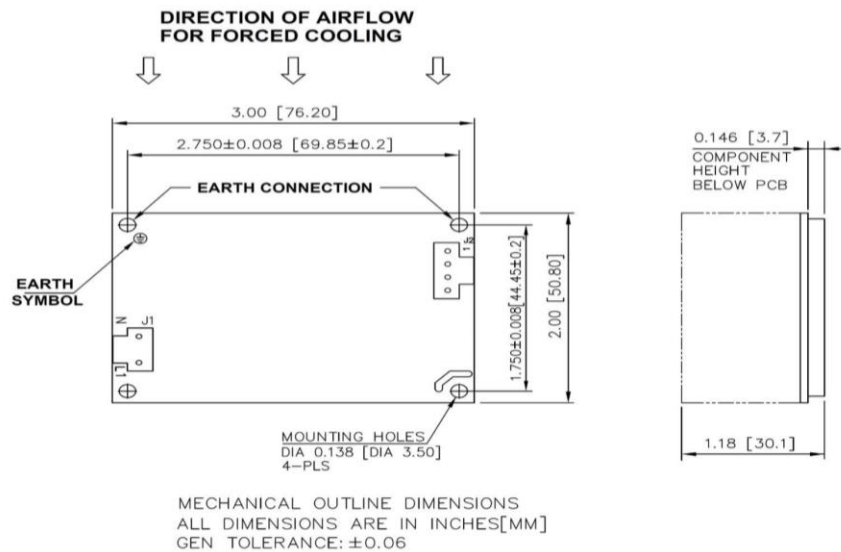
Mechanical Drawing - Molex Header (Option 2)
